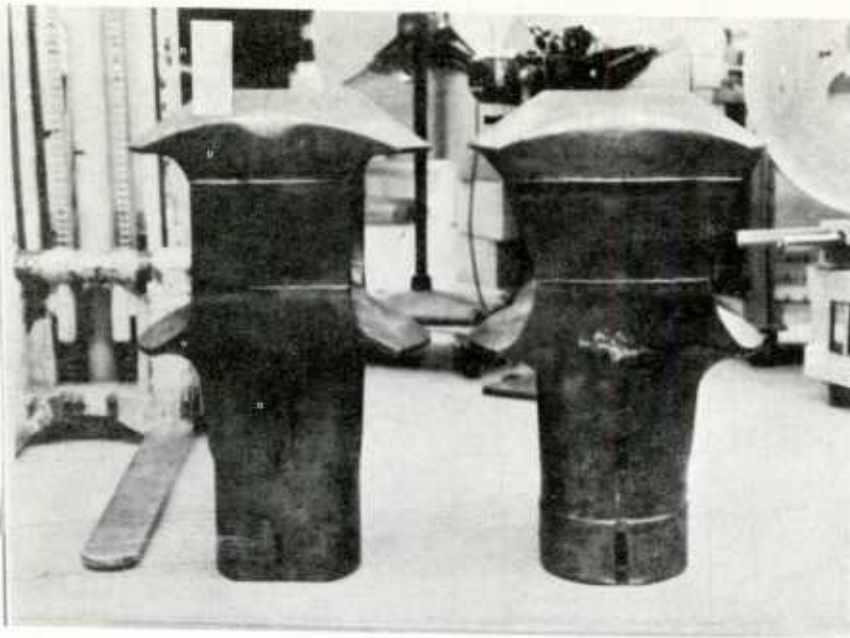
Welded Muzzle Brake Assemblies,
